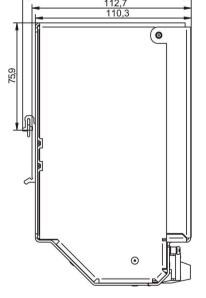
Dimension drawing 6EP4133-0JB00-0AY0
